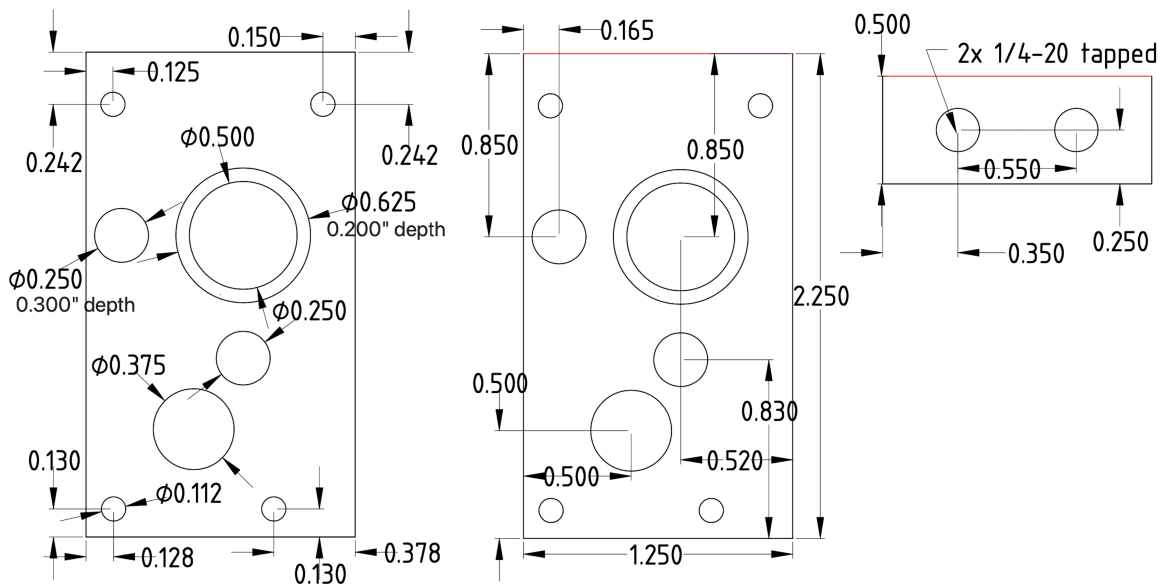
Engineering drawing of lower 6061 aluminum guide. Red edge denotes shared edge between drawings. Units are in inches.
